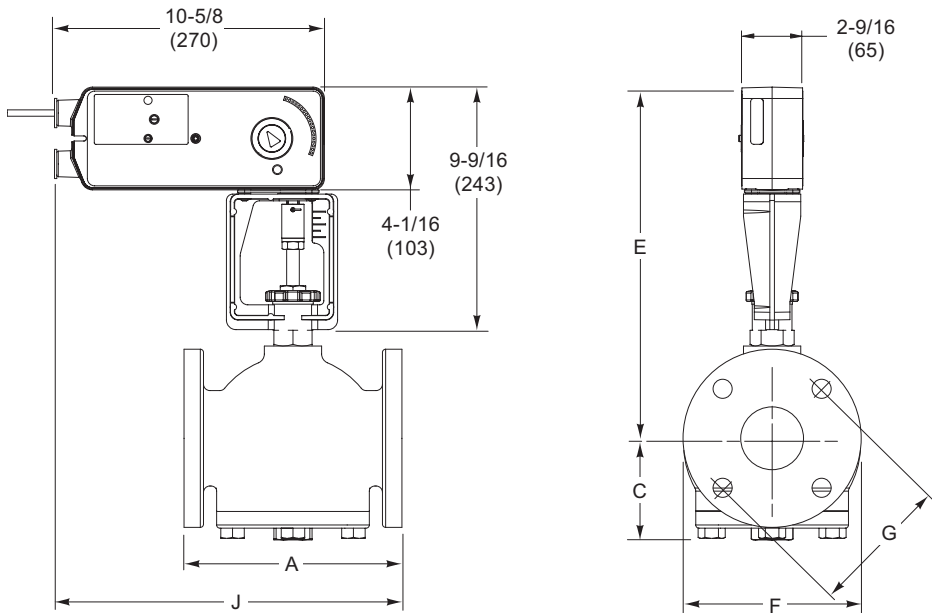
Mx61-720x with 2-1/2" to 4" N.C. 2-Way Flanged Globe Valve.
